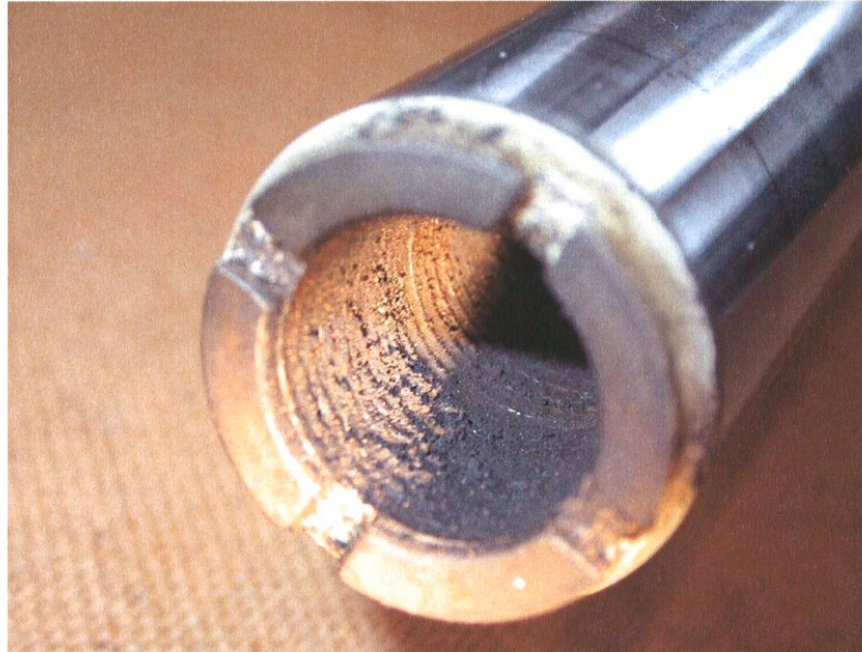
Close-up view of the threads from the right hand actuator piston rod and rod end.
